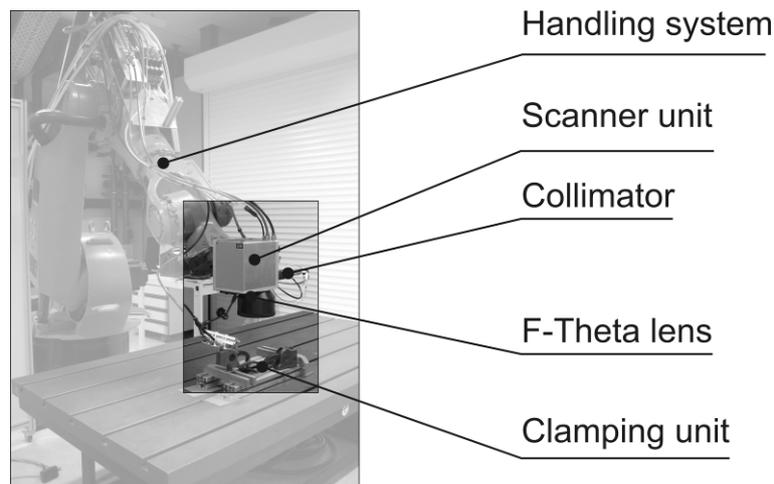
Experimental set-up of a remote cutting station consisting of the handling system, the collimator and scanning unit, the F-Theta lens and the clamping device for the workpiece.
